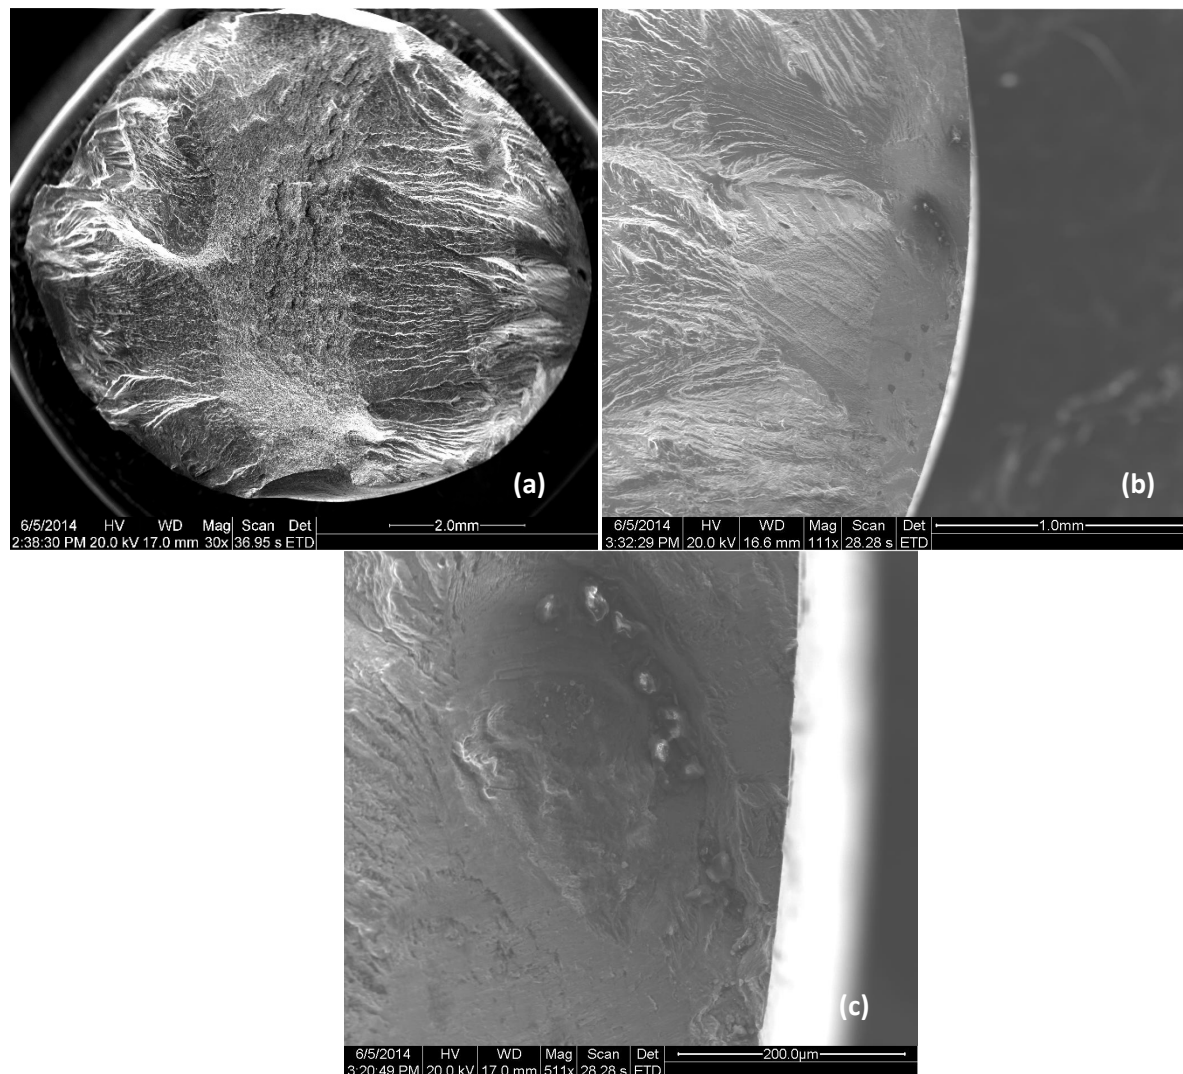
Fracture surface of sample 9. (a) Overall view of sample. (b) Close up of area where crack is thought to have initiated. (c) More zoom into smooth area where crack may have started shows a valley that reaches to the surface that could have caused sample to fail.
